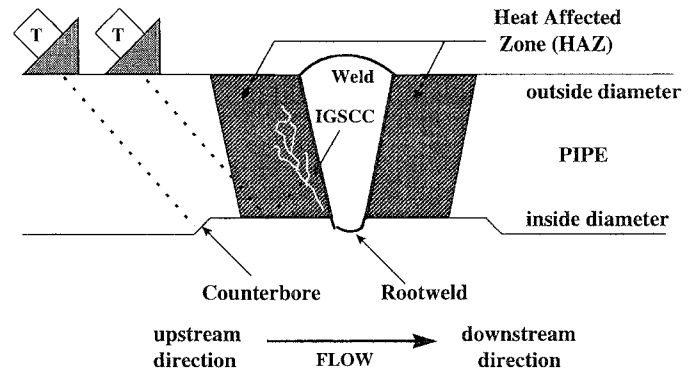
Typical weld geometry for ultrasonic inspection.
